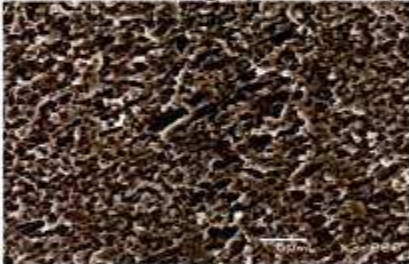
Fractograph - Bolt 4 (x3000, SEM)
